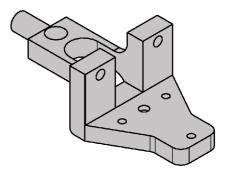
Intermediate bracket holding the ladder at the right side and inserted into the knuckle on the left side
